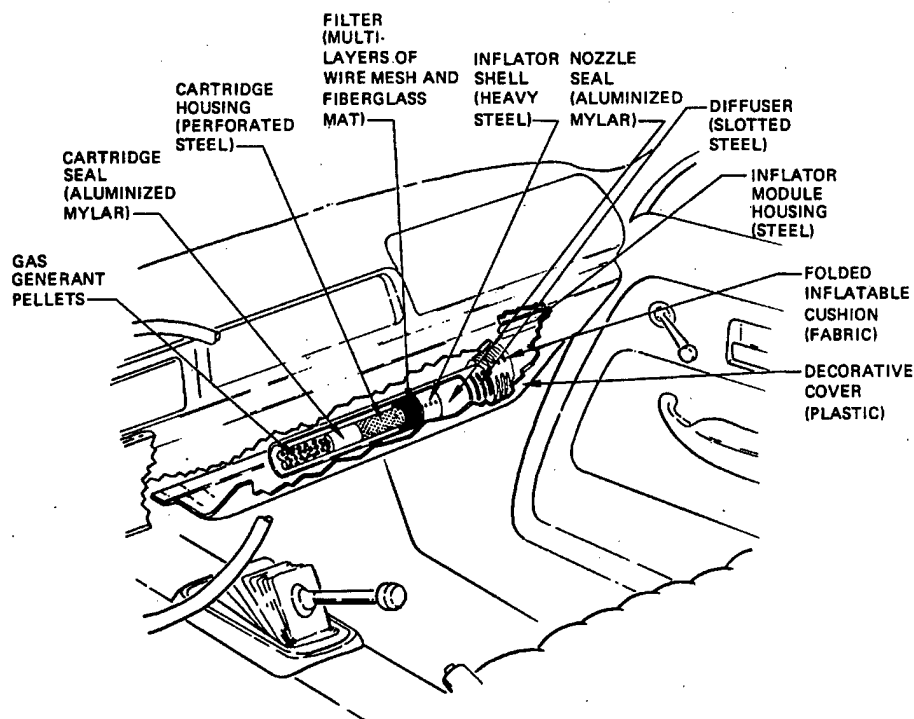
Cutaway view of inflator installed in automobile dashboard
